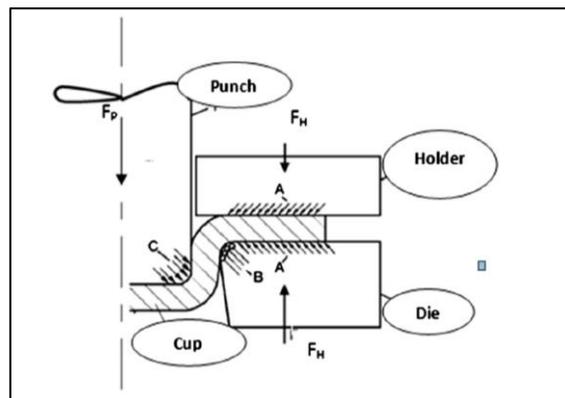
Friction area when deep drawn a cup (A) Friction area between sheet metal blank and holder and sheet metal blank die; (B) friction area between sheet metal blank and the die radius and (C) friction area between sheet metal blank and punch edges; F_p - total drawing force; F_H , blank holder force.
